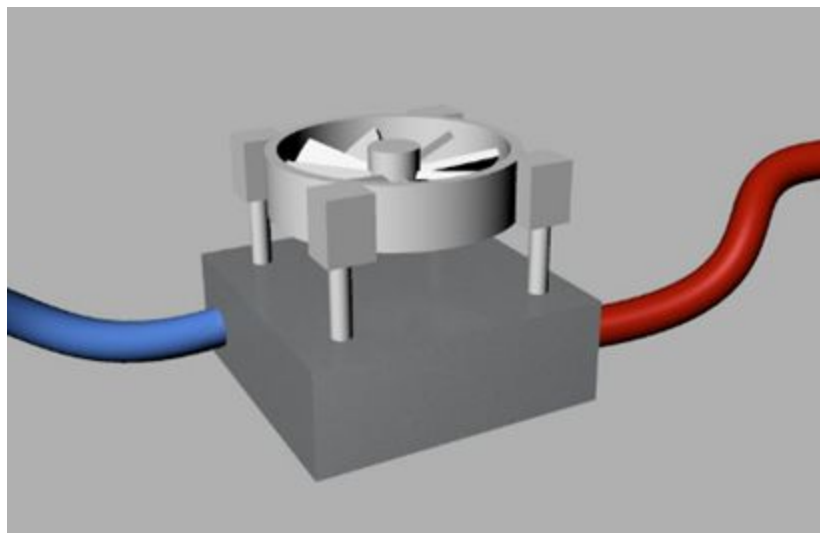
models a potential design in which the surface or base of the stirling engine body will be designed to have a large surface area. The engine will be positioned such that the cold side of the engine body is in contact with the refrigerator's interior and will thus cool the internal
